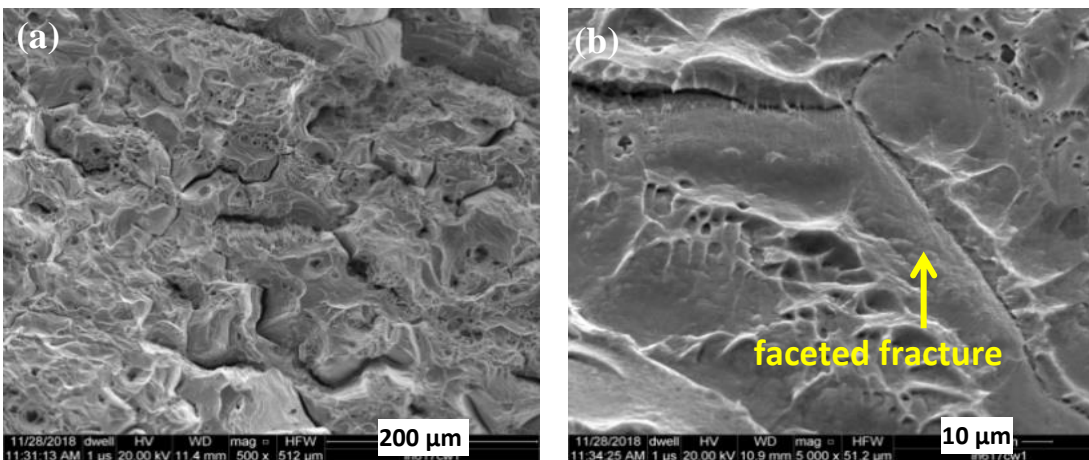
SEM fractographs of tensile tested samples at RT in SQ-CW condition showing: (a) dimples with cleavage facets and (b) magnified view of the facets.
